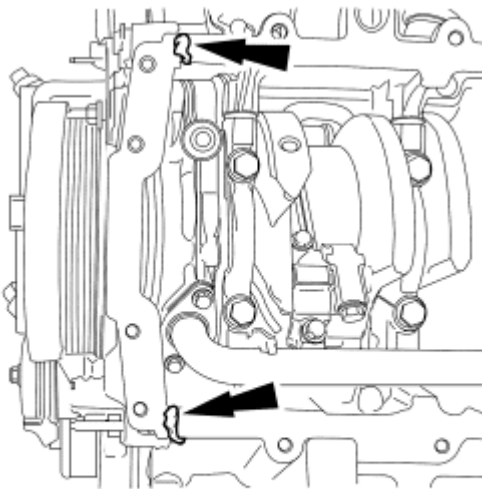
Locating Crankshaft Rear Seal Retainer Plate-To-Cylinder Block Sealing Surface Sealant Applying Area
